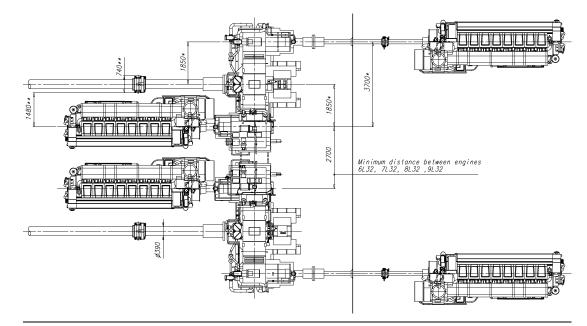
Main engine arrangement, in-line engines (DAAE059178)
